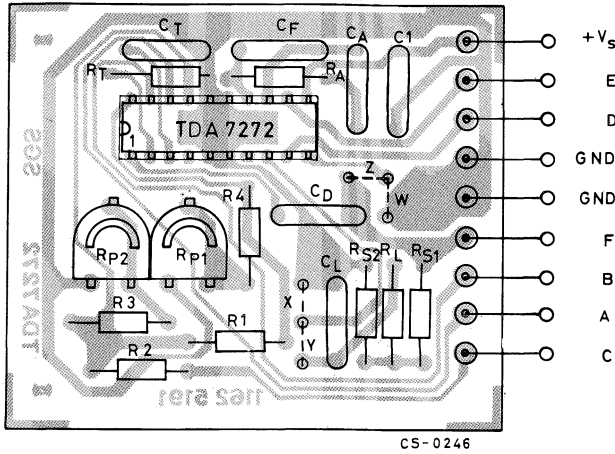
P.C. board and components layout of the circuits of Fig. 20, 21, 22
